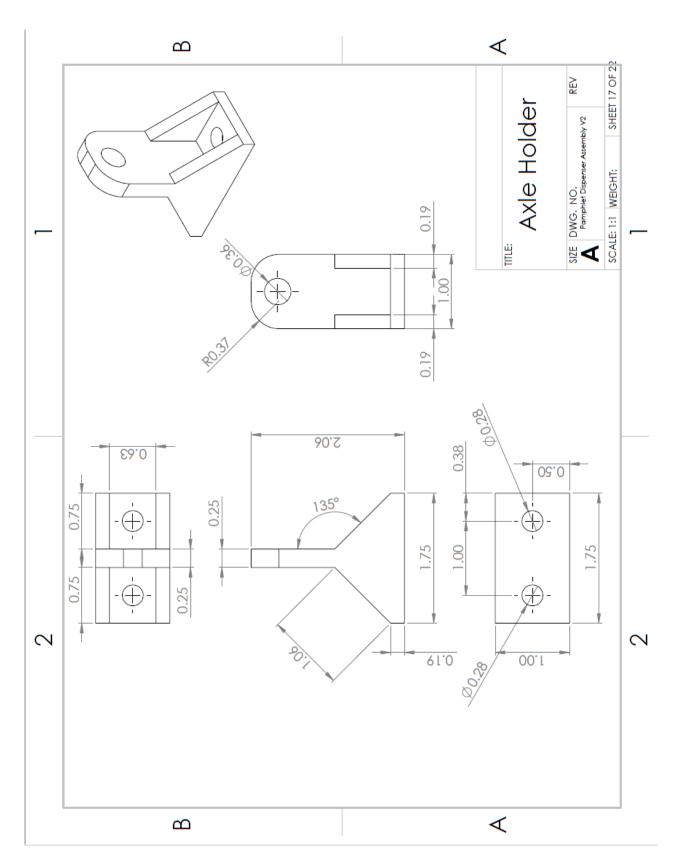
Pamphlet Dispenser Axle Holder Drawing (not to scale)
